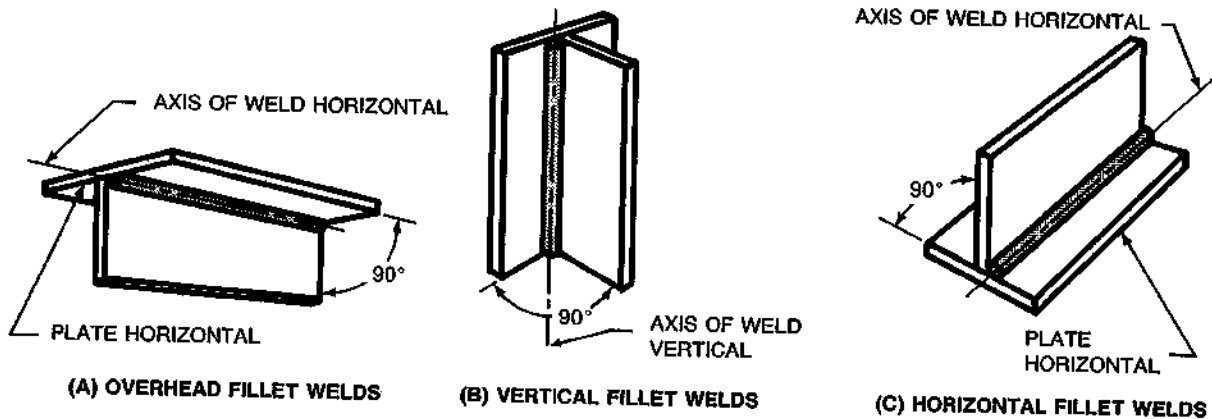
Welding Positions for Fillet Weld Test Assemblies
